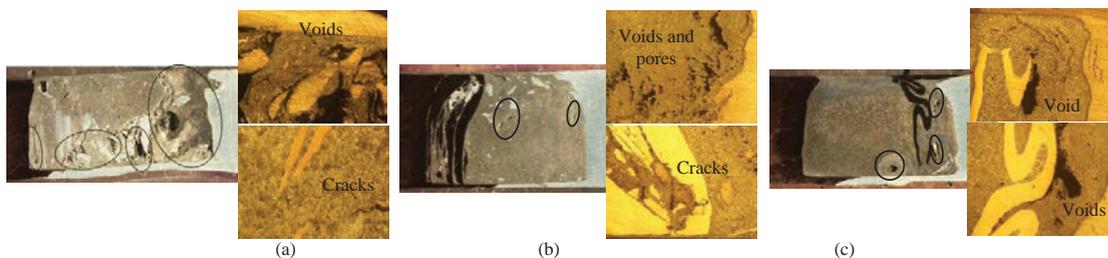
cross sectional view of welds made by tool having pin profiles designed based on constant static volume: (a) triangular, (b) square and (c) hexagonal
